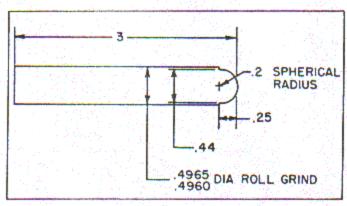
Low Pressure Relief Valve Blocking Pin
